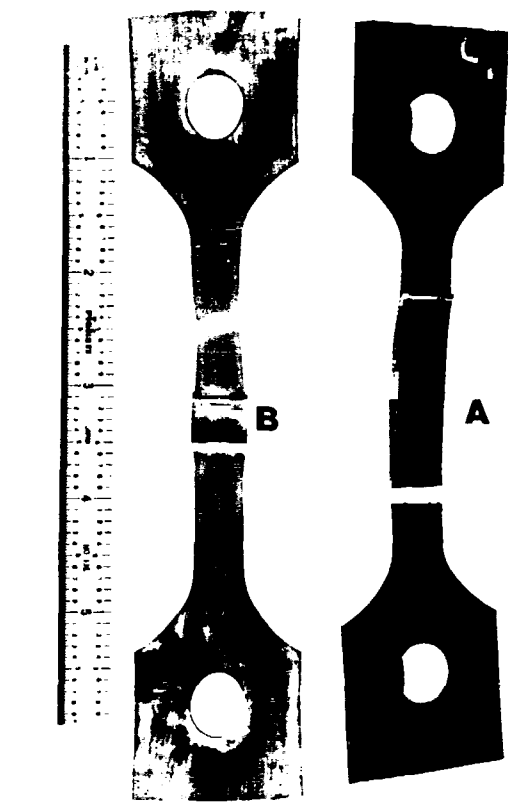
Typical tensile fracture. The fractures occurred adjacent to the weld in the heat affected zone in the three piece joint design (A), and away from the weld in the two piece joint design (B).
